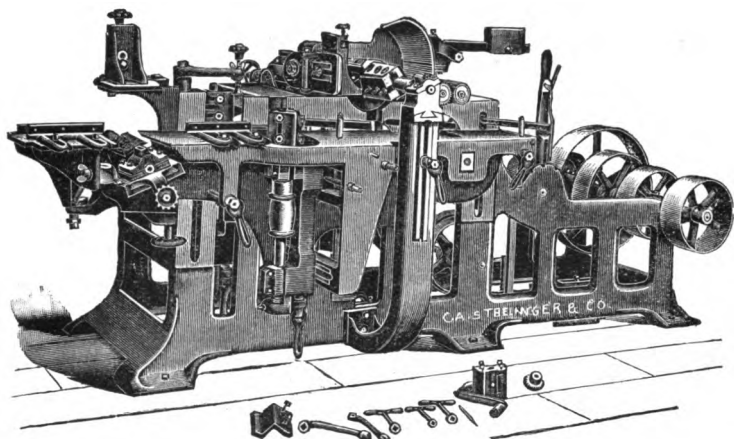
NO. 1—7 INCH FOUR-SIDED MOULDER.
